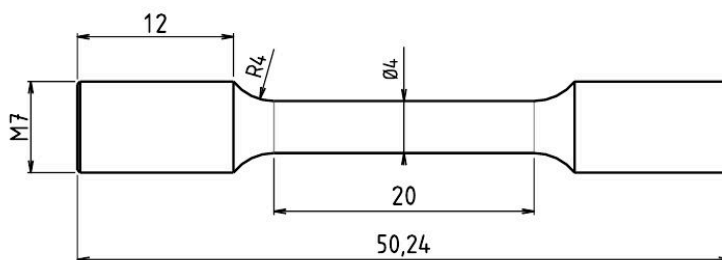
Dimensions of the smooth tensile specimens used in the experimental tests.
